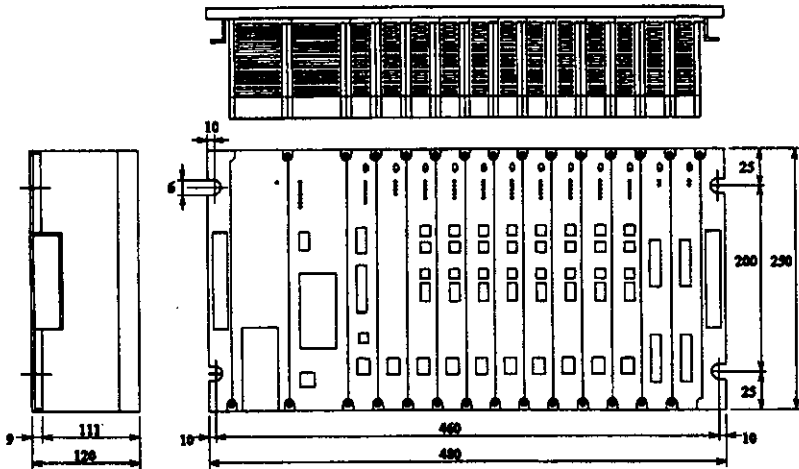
CP-9200SH External Dimensions (MB-01)
